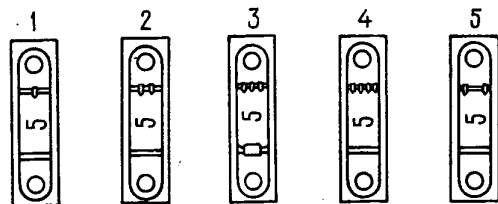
Marks on Main Bearing Caps (bearings are counted from engine front) and Cylinder Block Code Number
